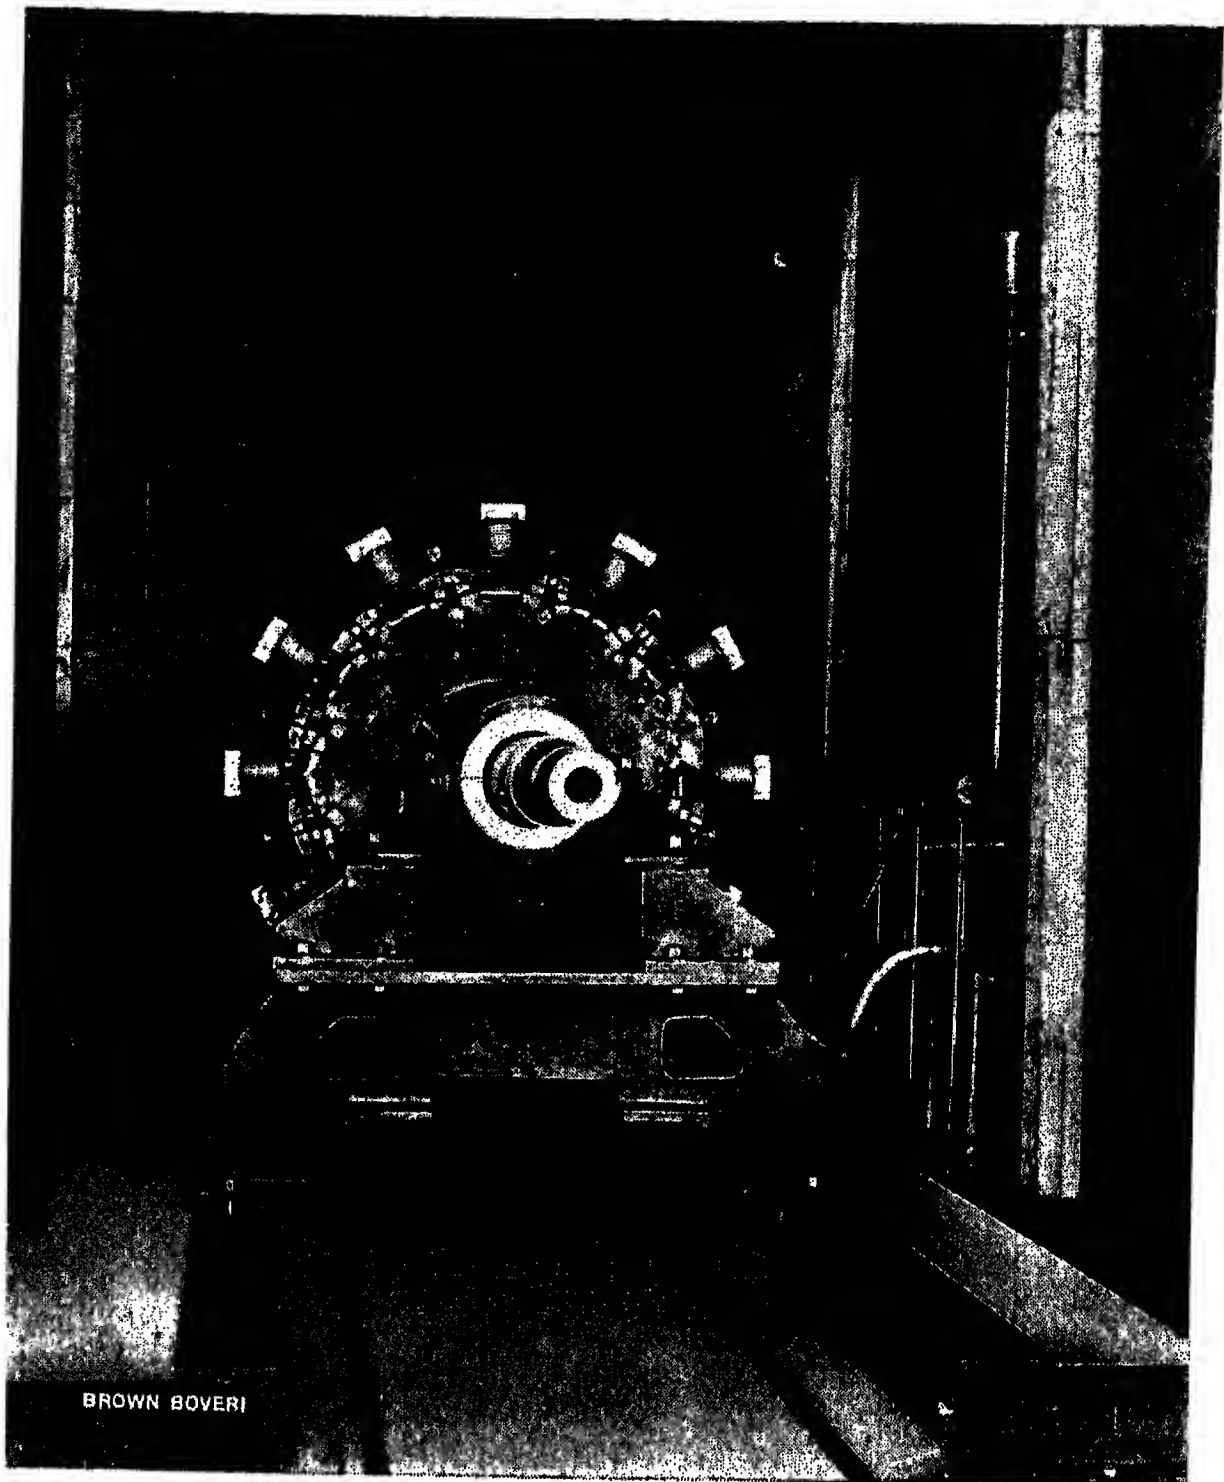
Finished rotor of a three-phase alternator, 16,500 kVA, 500 r. p. m., for balance testing on the over-speed test bed.
